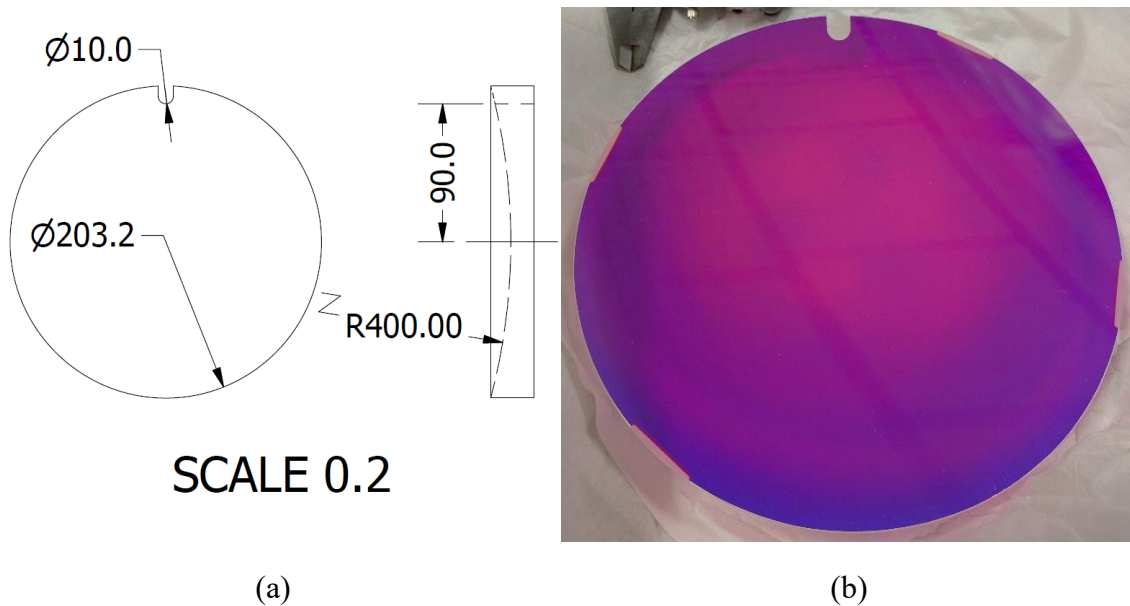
Slotted multiple-pass cell mirror in (a) dimensioned CAD drawing and (b) photograph. Dimensions in the drawing are in millimeters.
